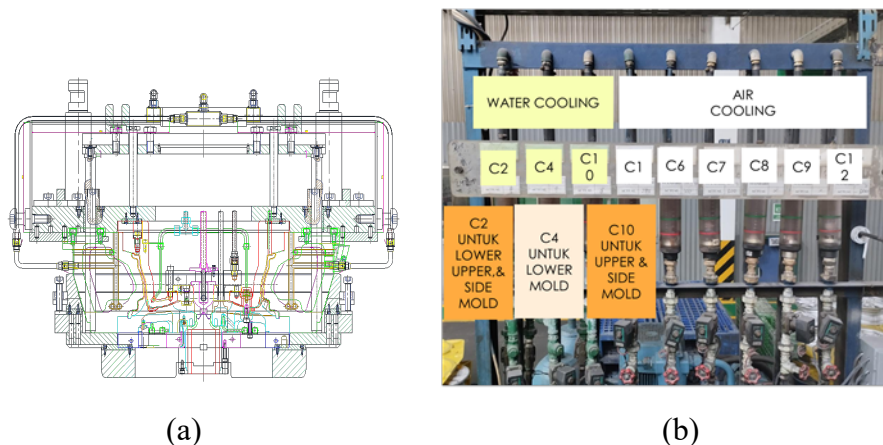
a - Set cooling channel : b - Cooling system machine casting
